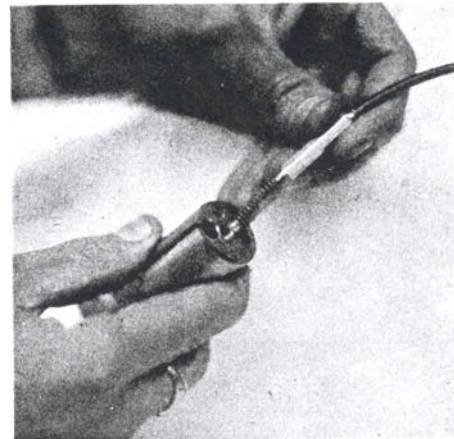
(A). SHOWING HOW TO REMOVE THE TAPER NEEDLE FROM THE THROTTLE OF THE TWO-LEVER CARBURETTOR
